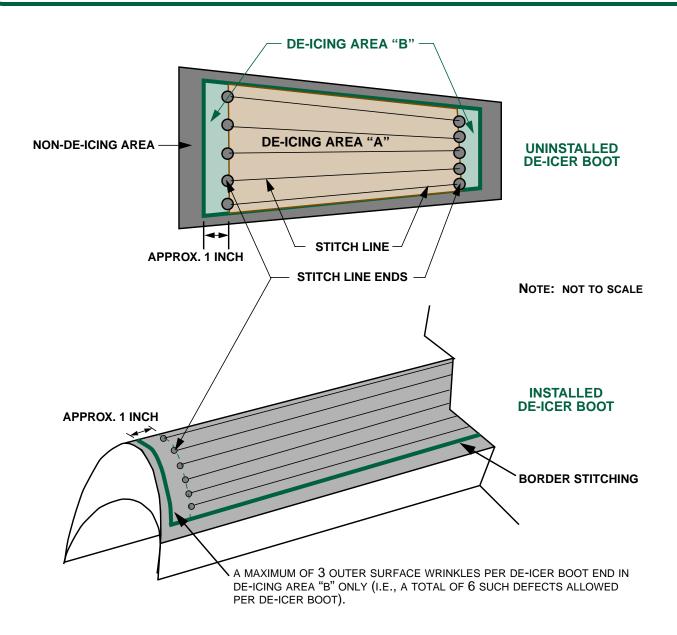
DE-ICING BOOT WRINKLE INSPECTION AREAS
